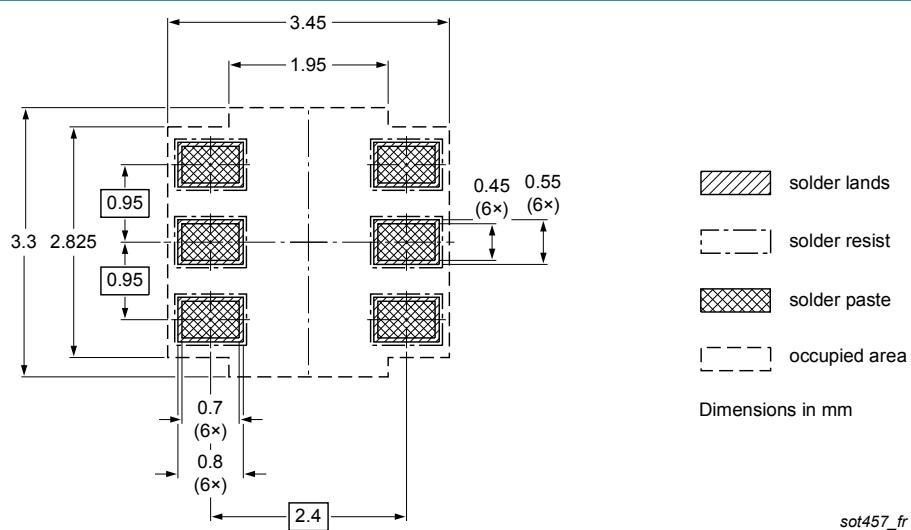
Reflow soldering footprint for TSOP6 (SOT457)
